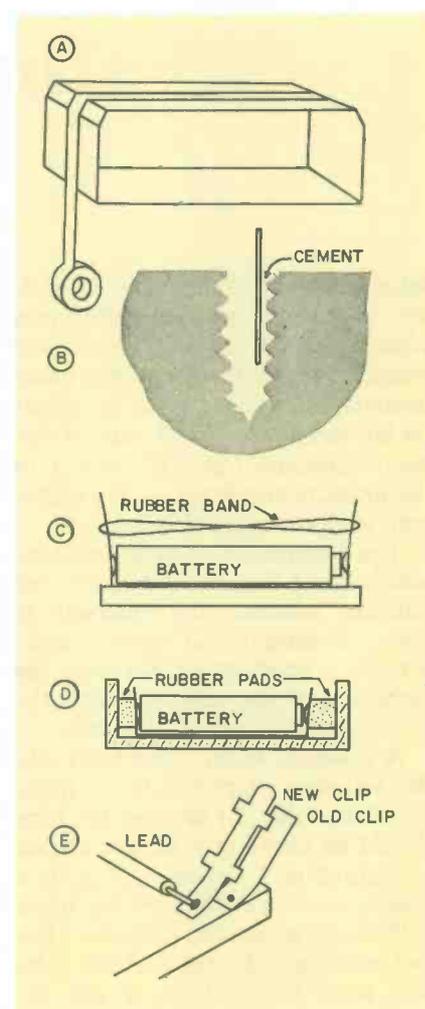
(A) — Use friction, masking or cellophane tape to hold cabinet parts together while drying. (B) — Apply Epoxy cement to inside of stripped-thread screw holes with thin wood shaving. (C) — Rubber band holds clips tight against battery contacts. (D) — Rubber pads may be cemented behind clips to provide more pressure on contacts. (E) — Clip-stiffeners cut from shim-stock brass are crimped on existing clips.
